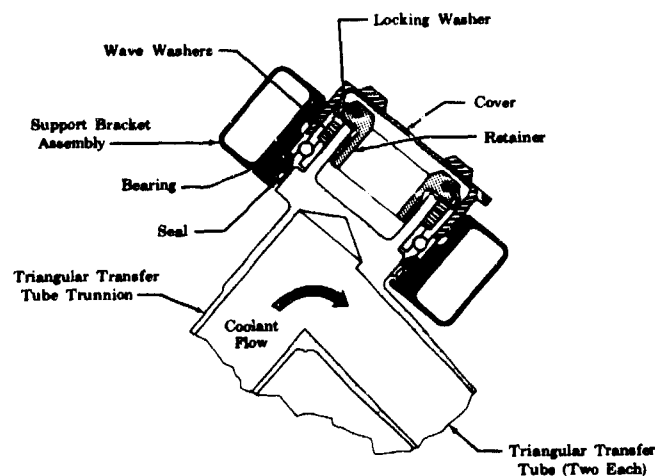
Triangular Transfer Tube Assembly FD 31012A
